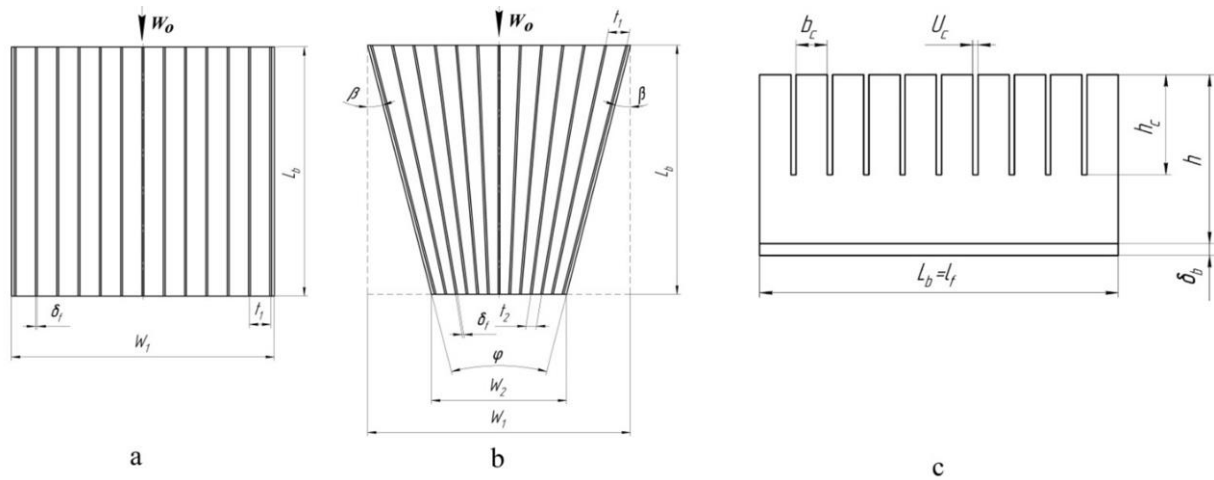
Design of heat sinks: a – type 1; b – type 2; c – middle fin side view of the heat sink type 3.
